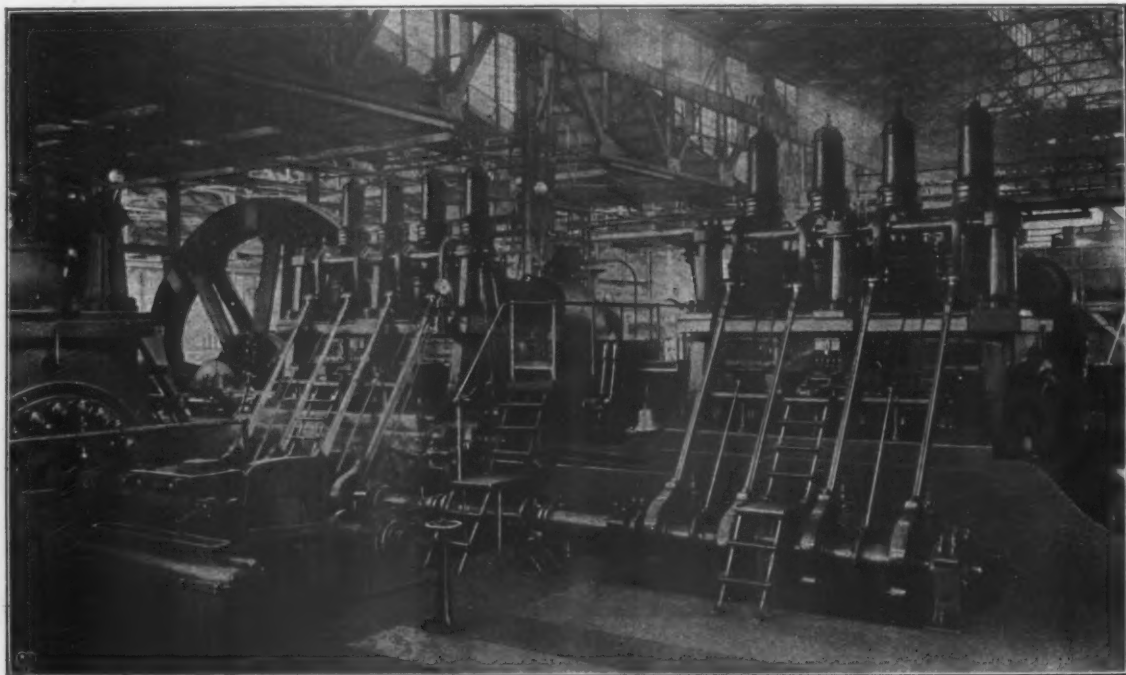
Rolling Mill Gas Engine for 700-Mm. Train.
